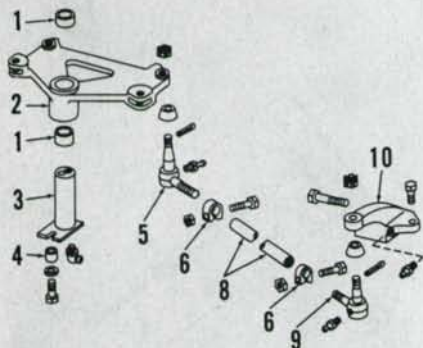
Exploded view of bellcrank and tie rods used on fixed axles. Refer to Fig. 3 for parts identification.
